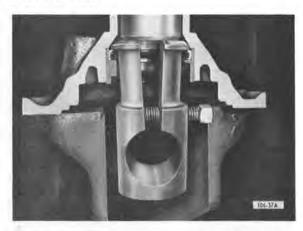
Pressing Sleeve and Seal Out of Cover
